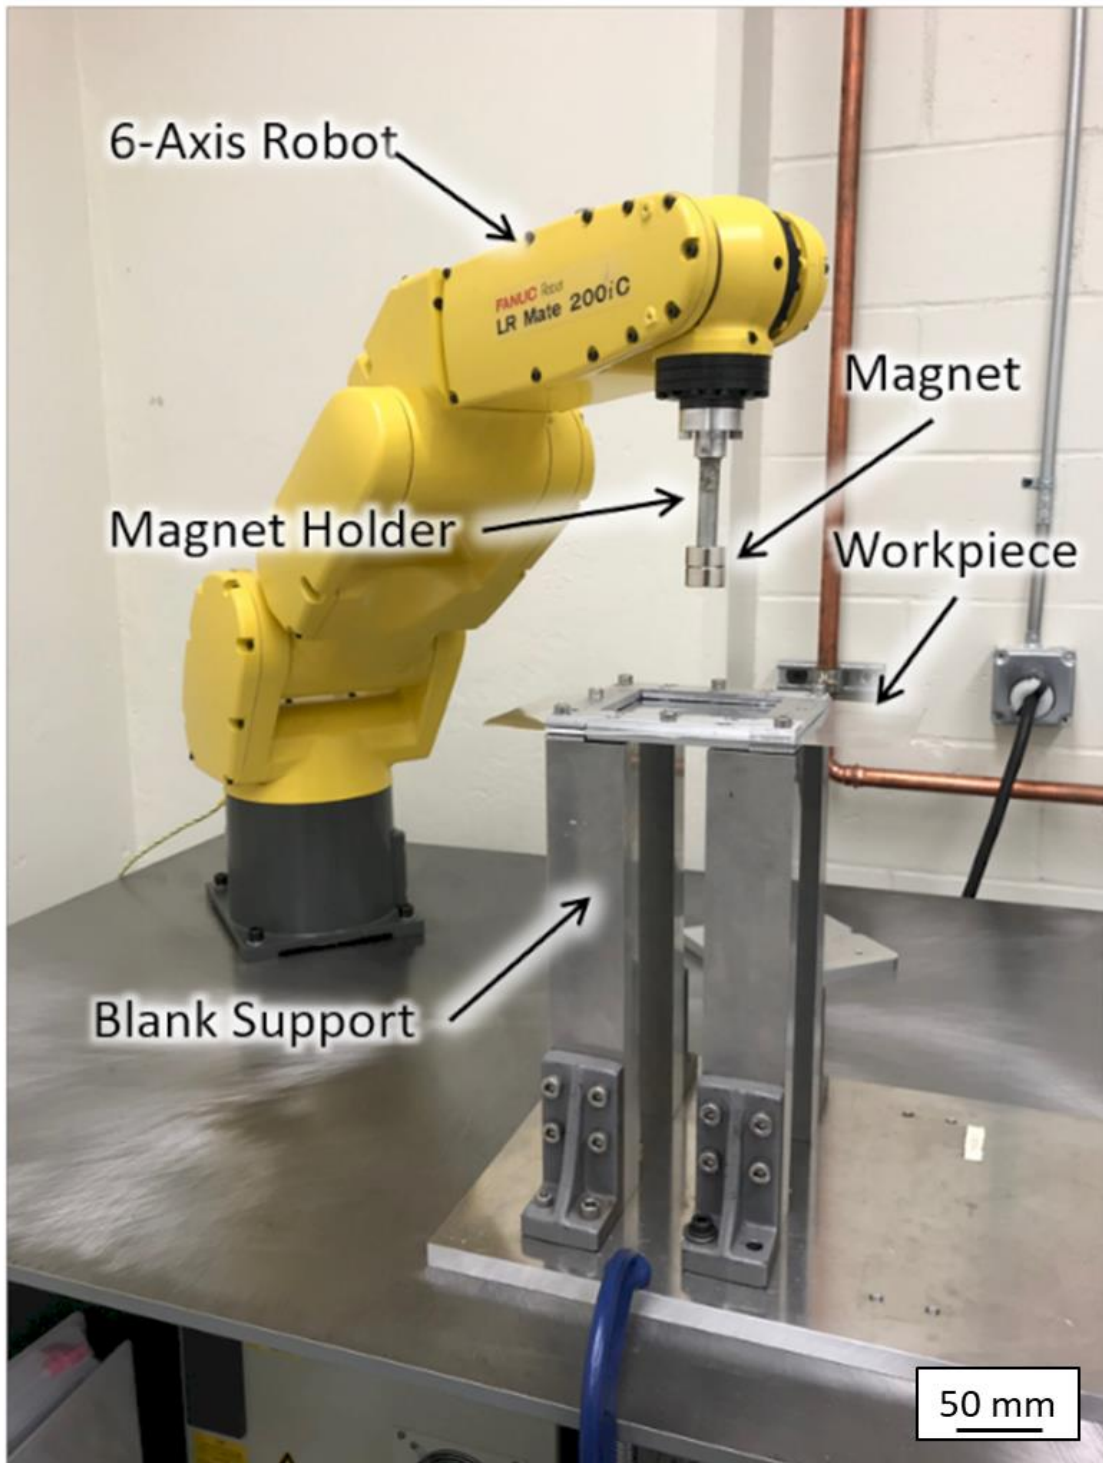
Magnetic Field-Assisted SPIF forming machine assembly.
